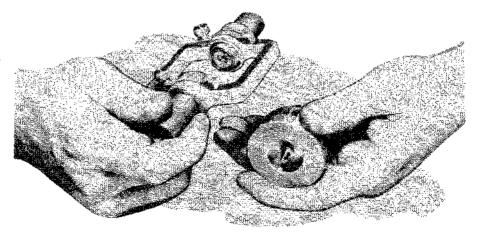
PLACING THE ROTOR IN FIXTURE T-22496 FOR THE DYNAMIC BALANCE
